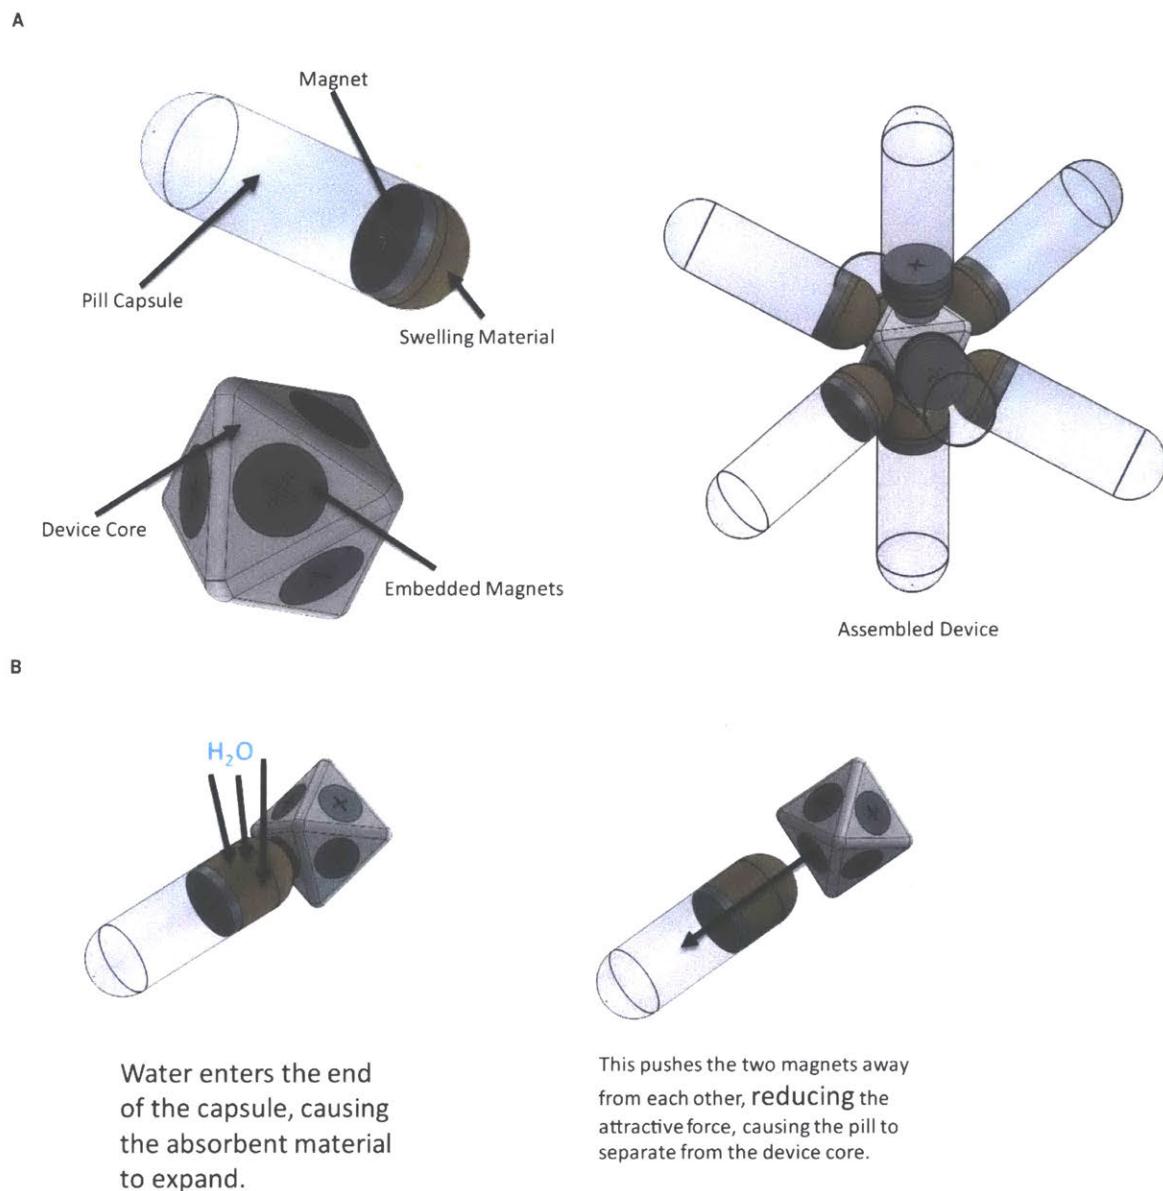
Magnetic capsule GRS assembly and disassembly.
